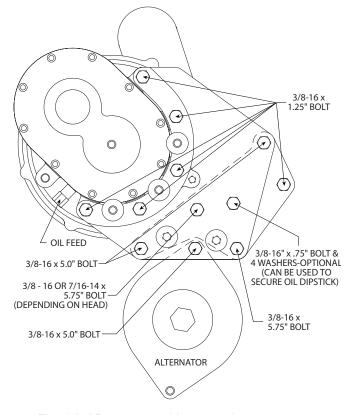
b / Passenger side supercharger mount ('69 Mustang)
